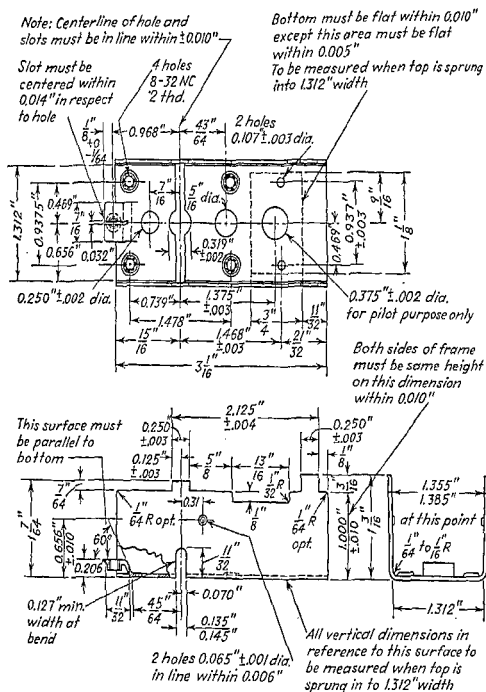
Part print of housing frame. (*White-Rodgers Electric Co.*)
